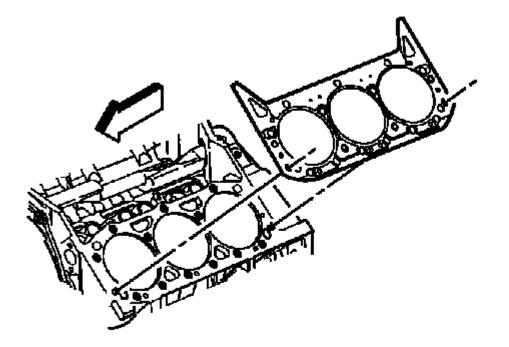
View Of Cylinder Head Gasket And Alignment Pins - Left Courtesy of GENERAL MOTORS CORP.
